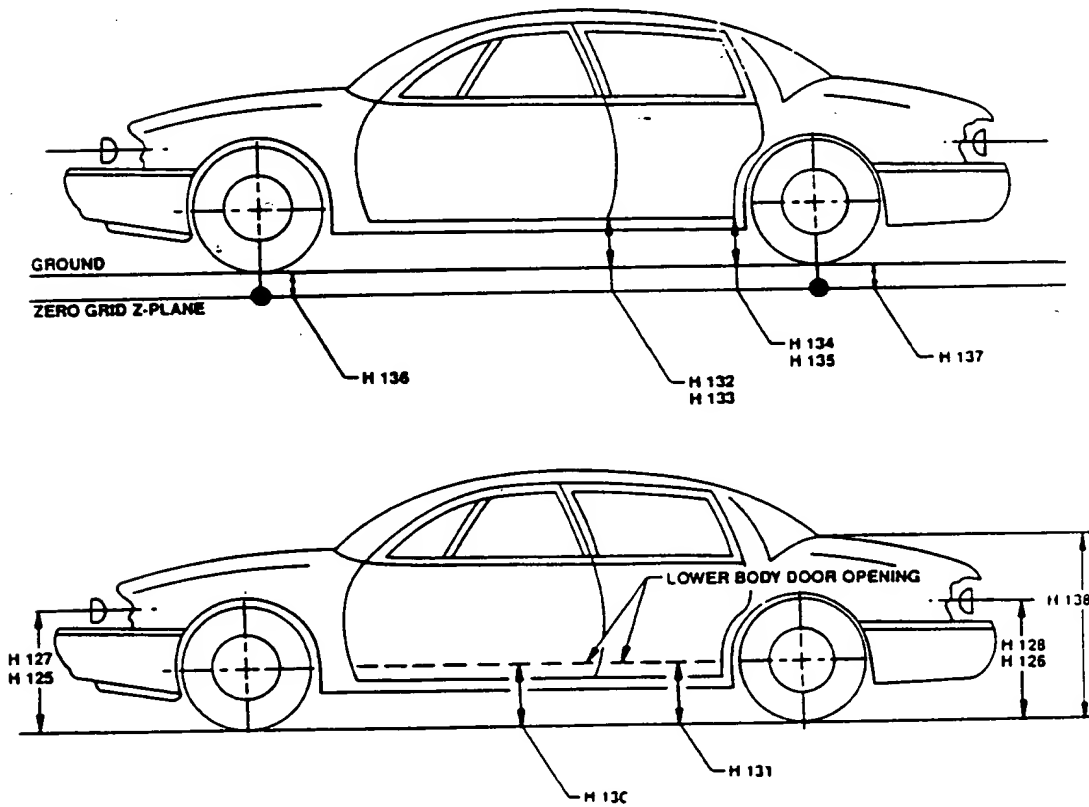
EXTERIOR DIMENSIONS, HEIGHT
